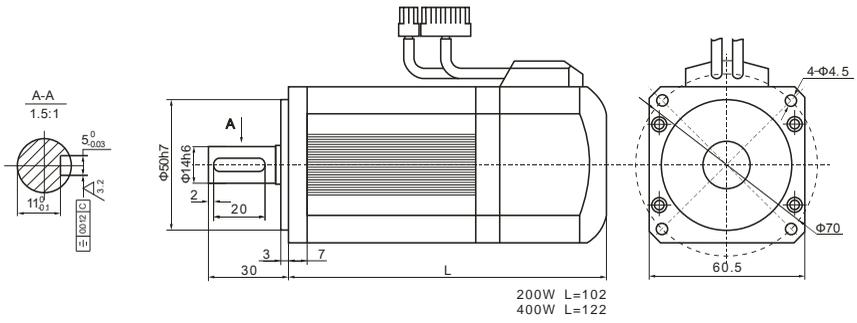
200W/400W (Low inertia) type Motor installation dimension (Unit: mm)
